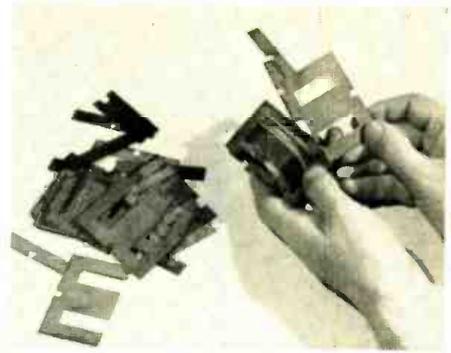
Disassembling the transformer used with unit. The "E" sections are retained.
